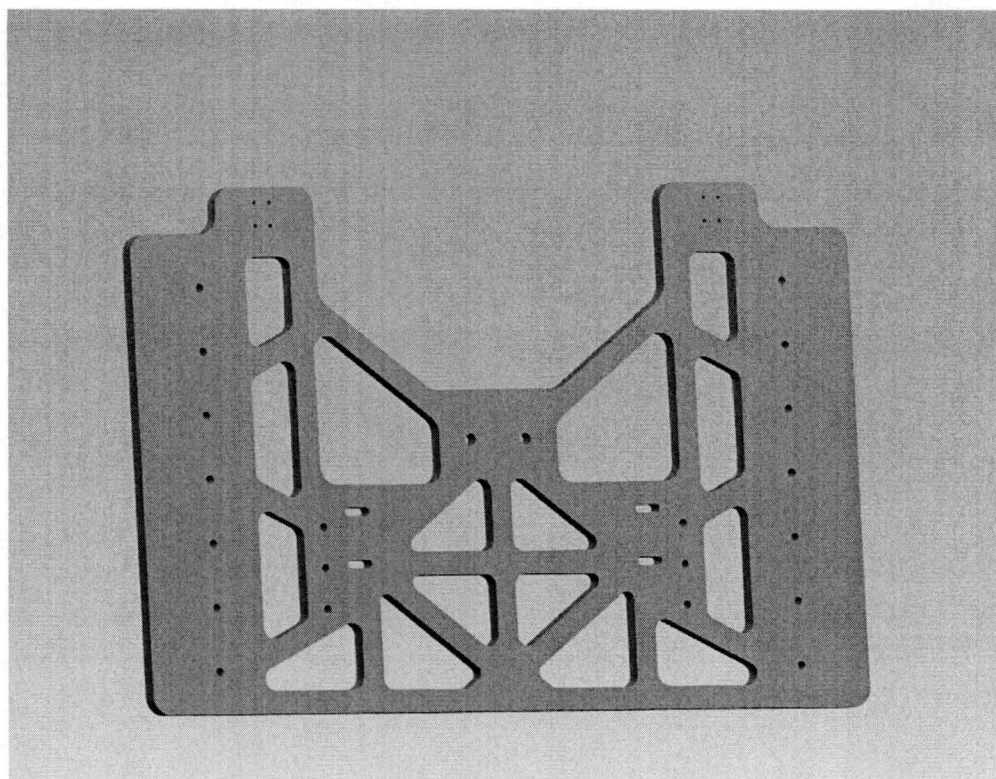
Pro-E Model of Stationary Back Mounting Plate
